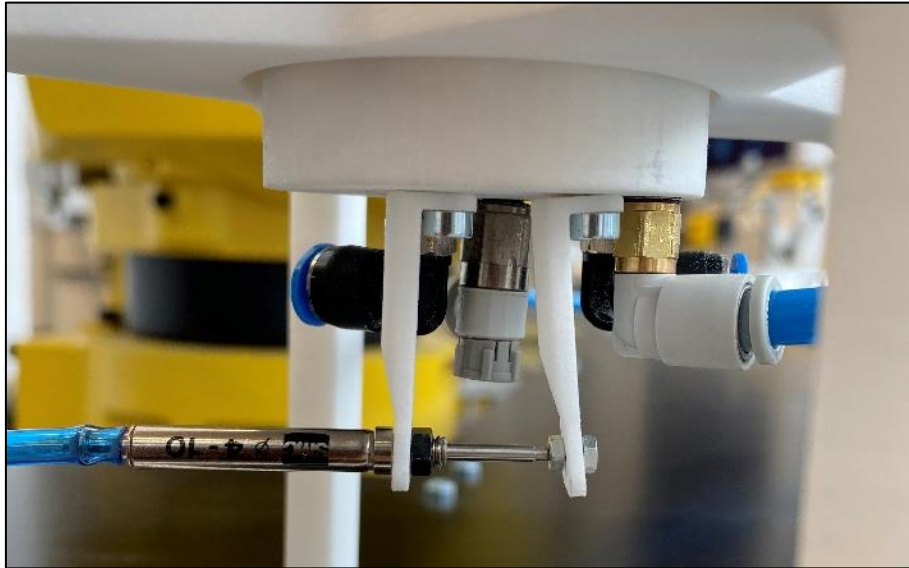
Close up of the bending of the stilts during rotation of the fixture
